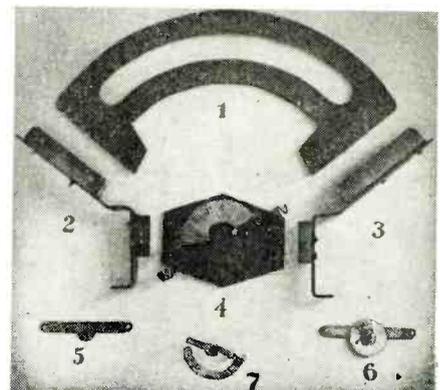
Exploded view of meter. 1—scale plate; 2 and 3—support brackets; 4—base plate; 5—bearing plate; 6—bearing plate with indicator bearing; 7—The rocker armature and its shaft.
